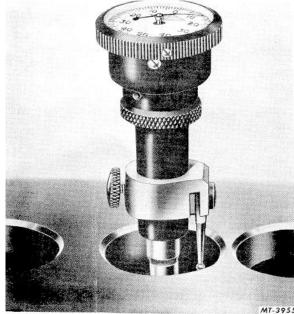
Using Gauge from SE-1631 Tool Grinder Set for Checking Seat Runout
